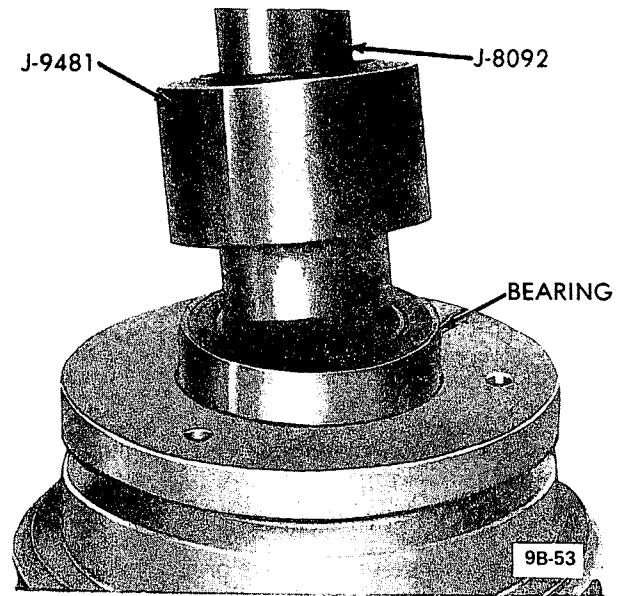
B-77 Installing Bearing into Pulley Assembly - 6 Cylinder Compressor
